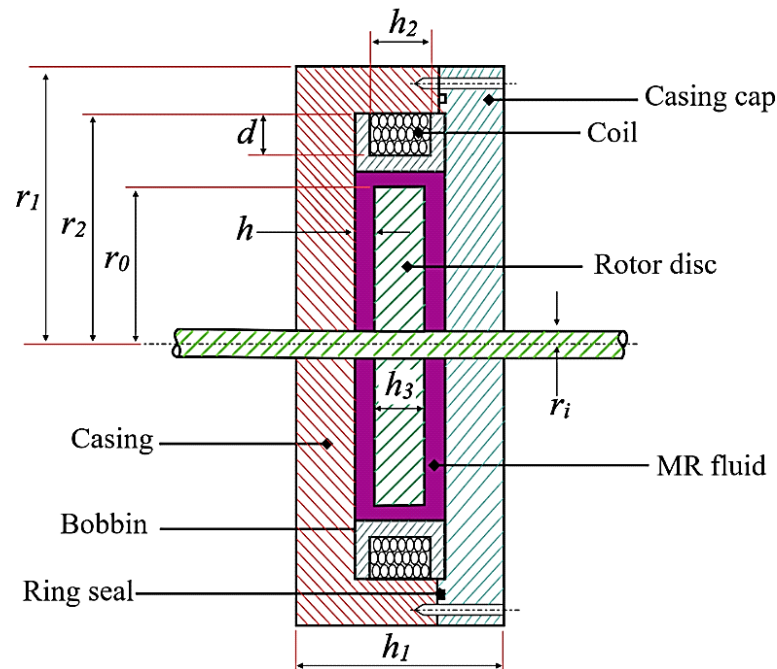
Cross-sectional view of MR brake with geometrical parameters
